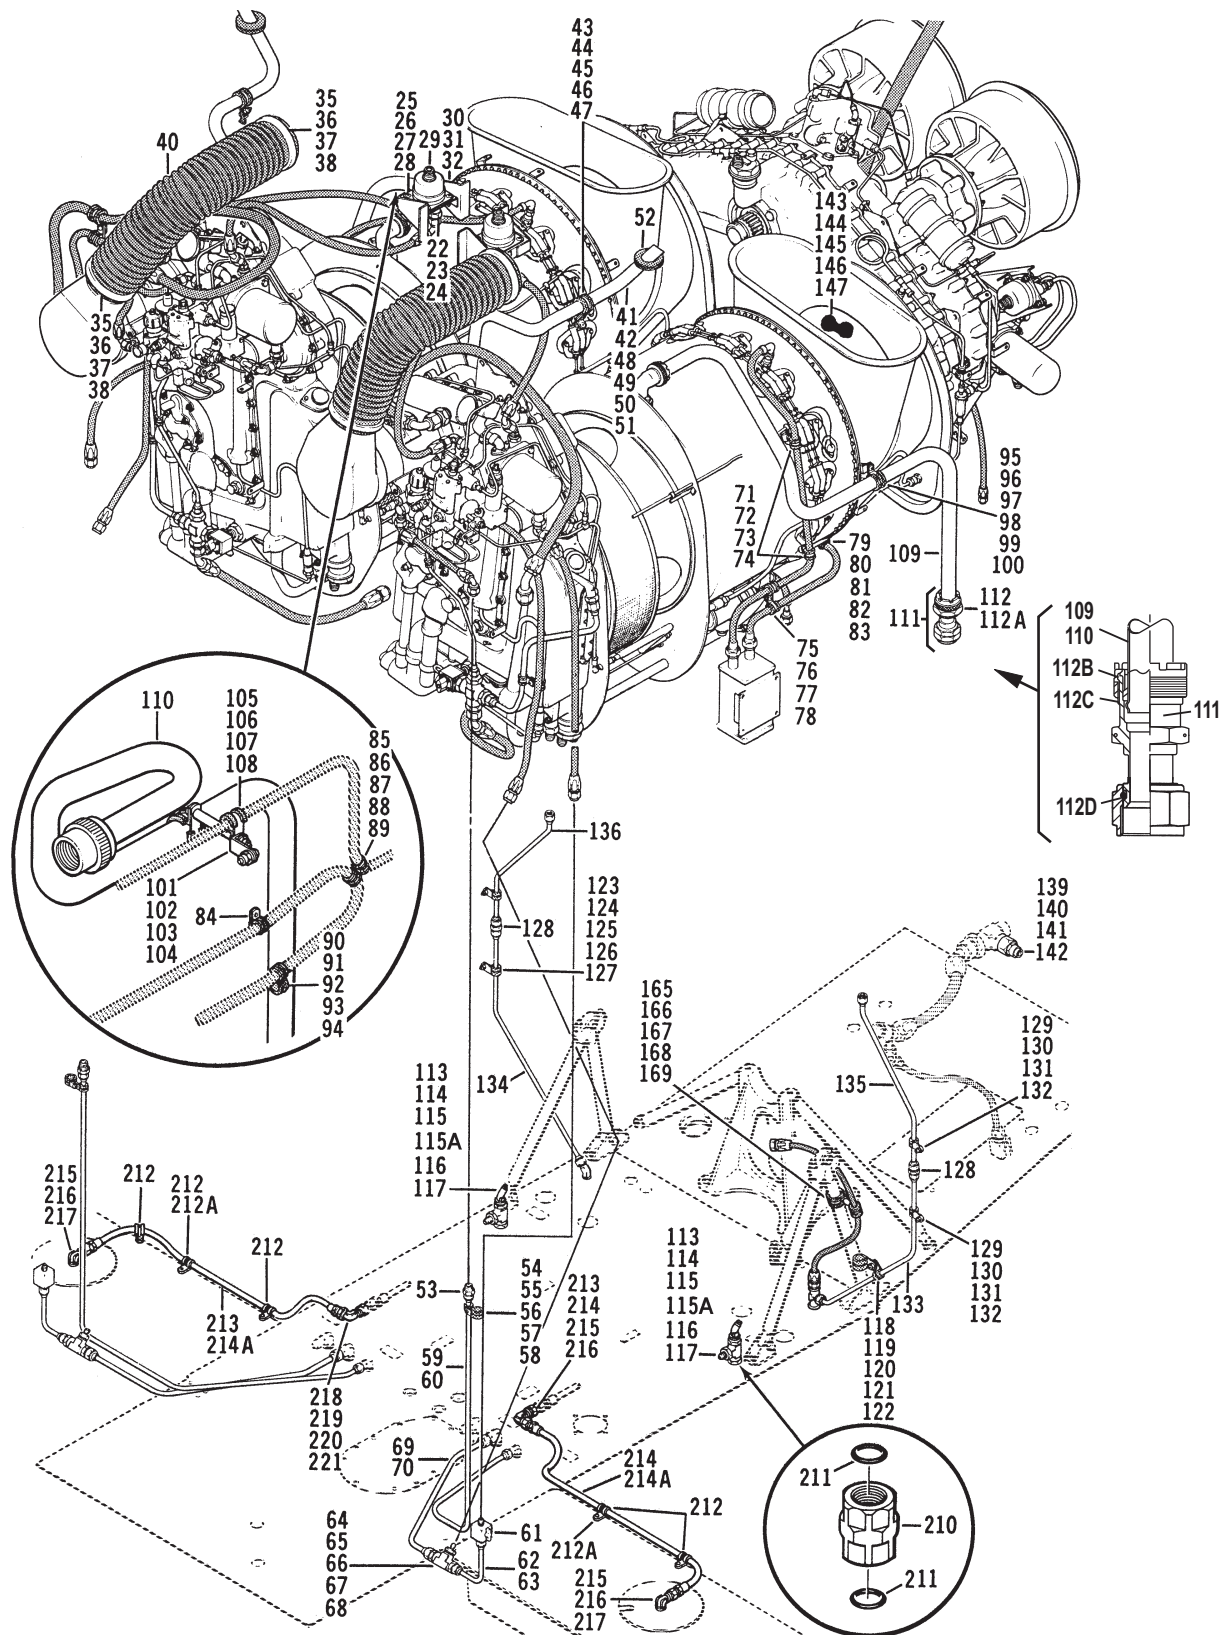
Power Plant Installation (Sheet 1 of 2)
